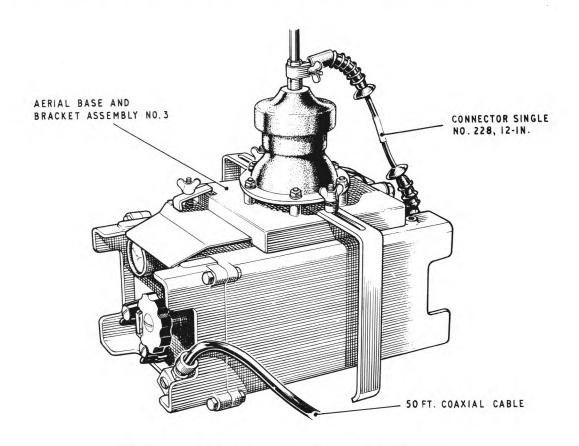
DISMOUNTABLE ATU NO. 7 ASSEMBLY FOR CII-R210
